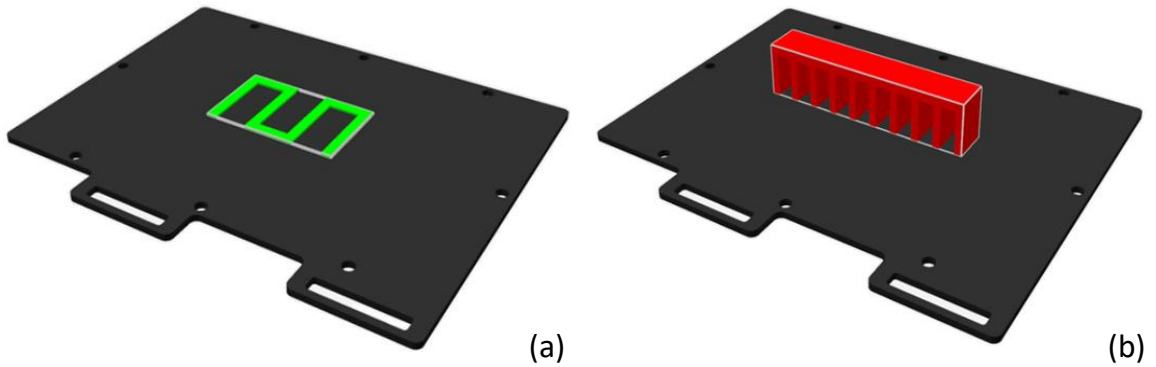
Layout of the printed parts with respect to the building plate; (a) planar spring, (b) bridge.
